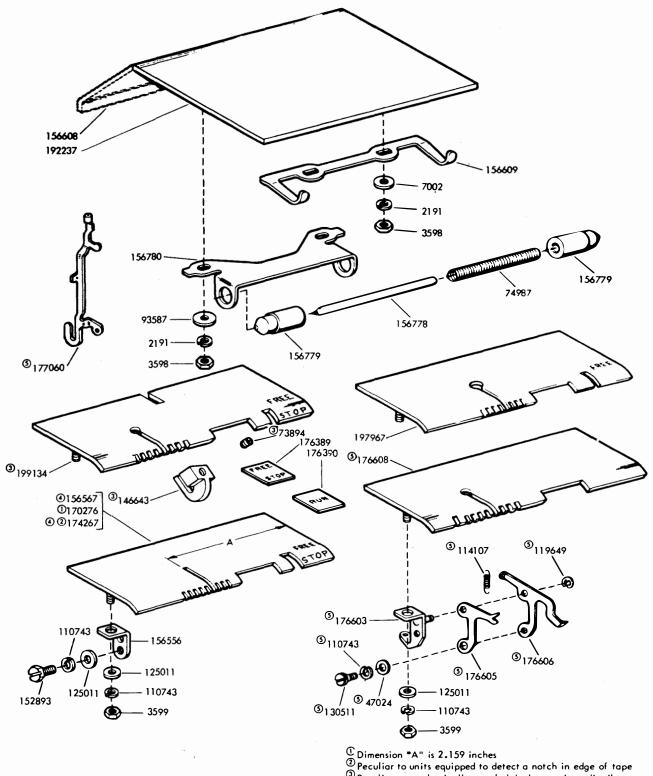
Tape Guide Plate Mechanisms (Sheet 3 of 3)
